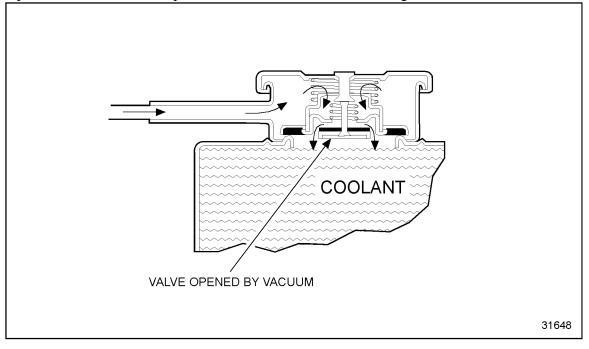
Pressure Control Cap — Vacuum Valve Open
